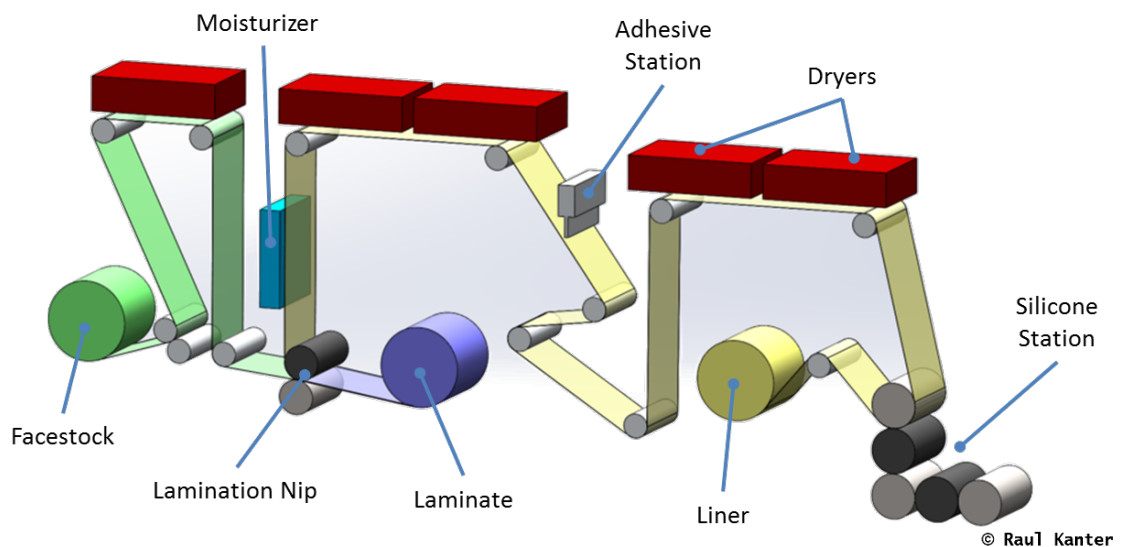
Coating machine and its main components. (Re-illustrated from [8])
